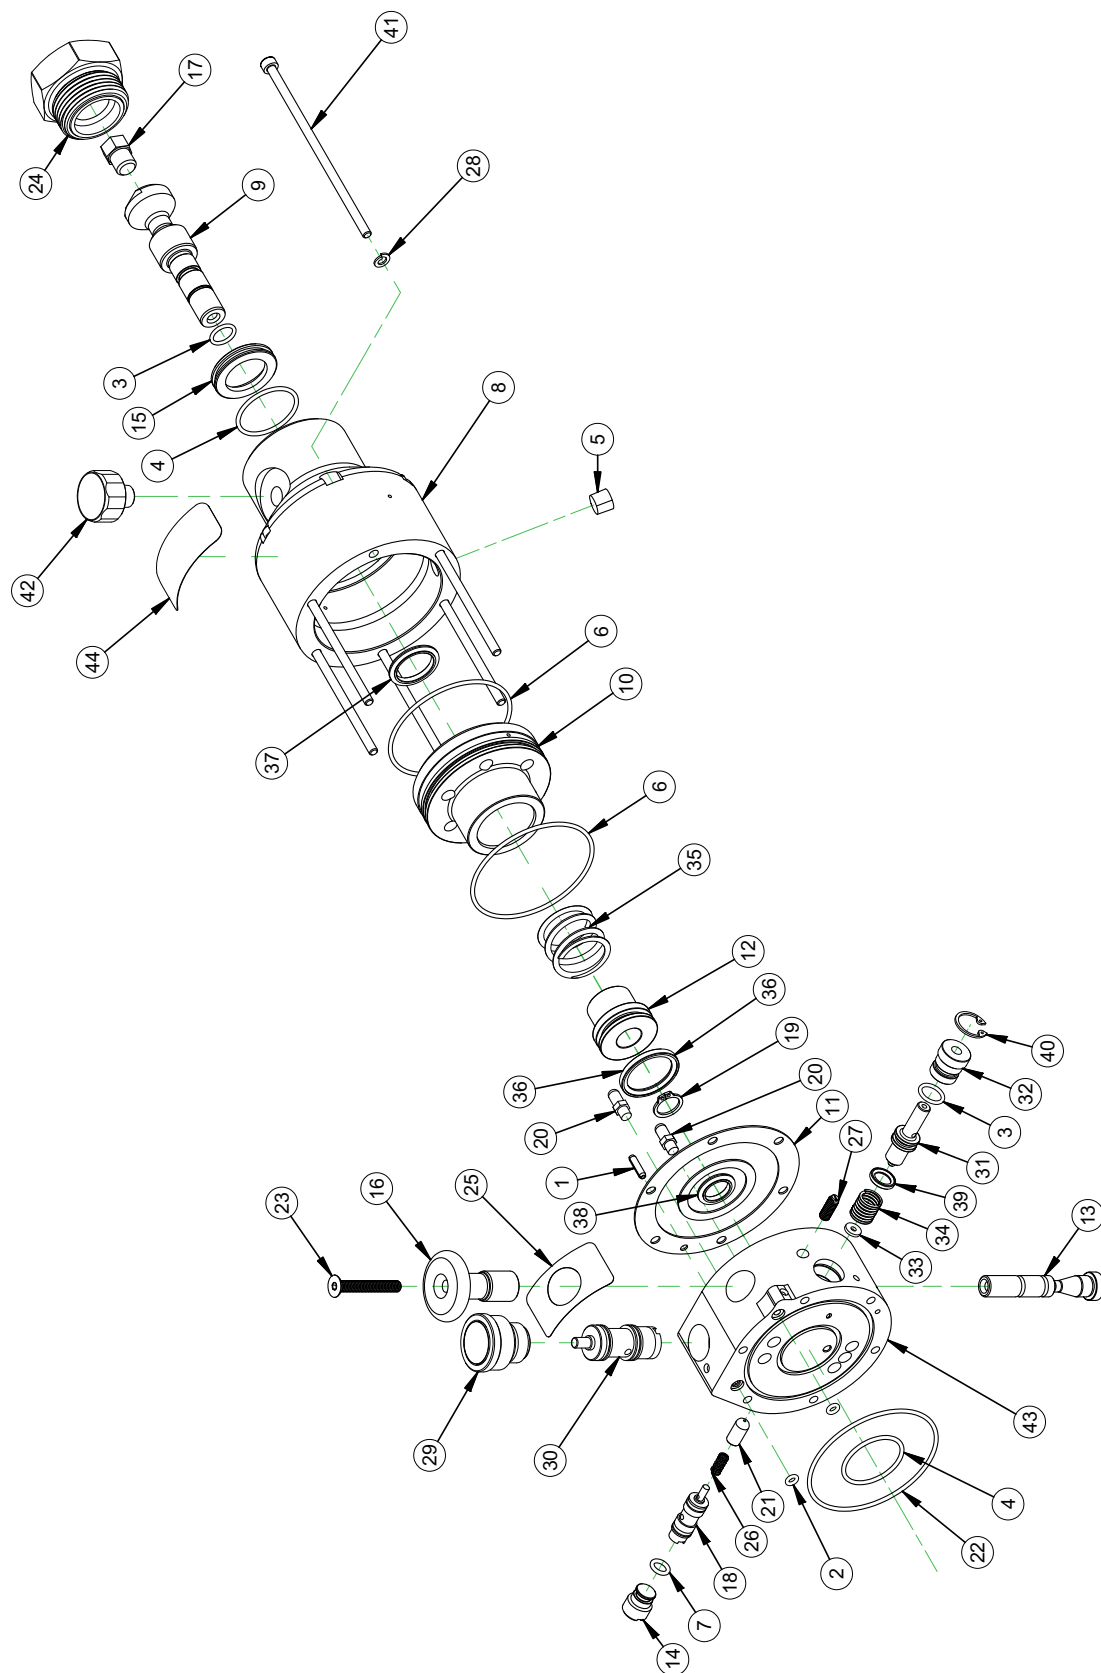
P/N 95333 PD3000 AIR MOTOR ASSEMBLY WITH CONTROLS
